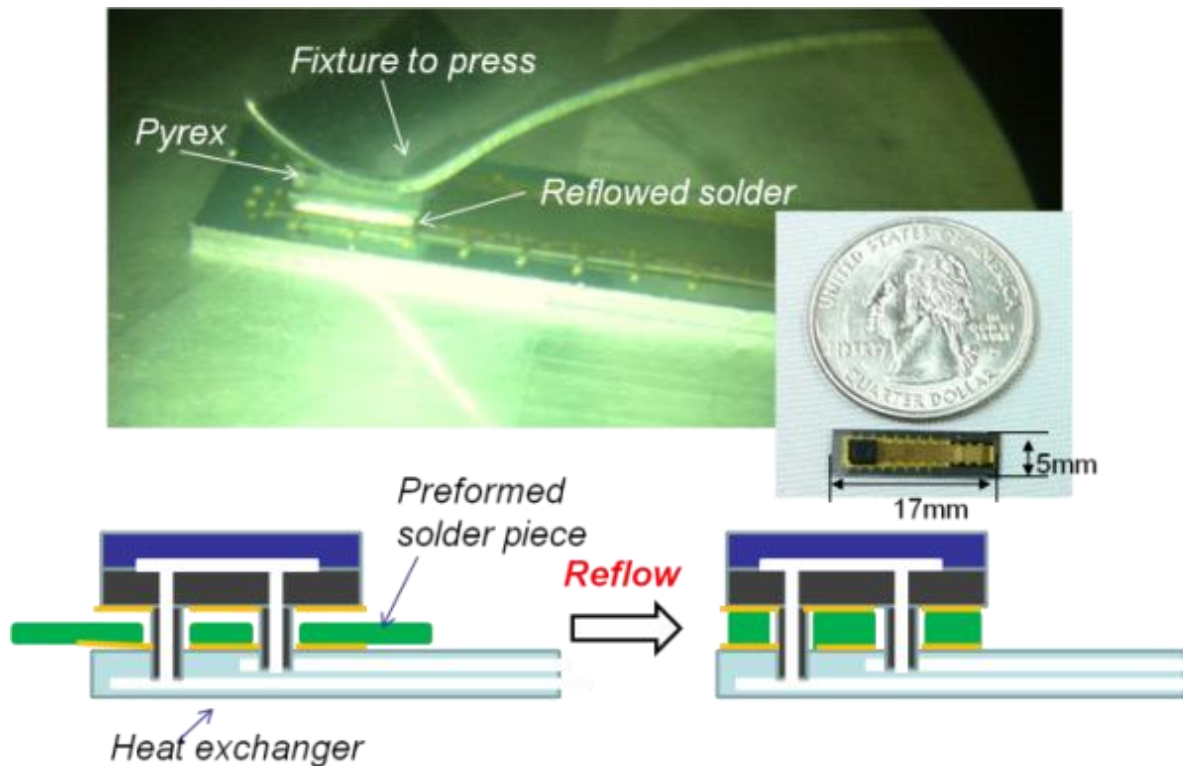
Solder reflowing method to make the connection and sealing of the cold head and the heat exchanger.
